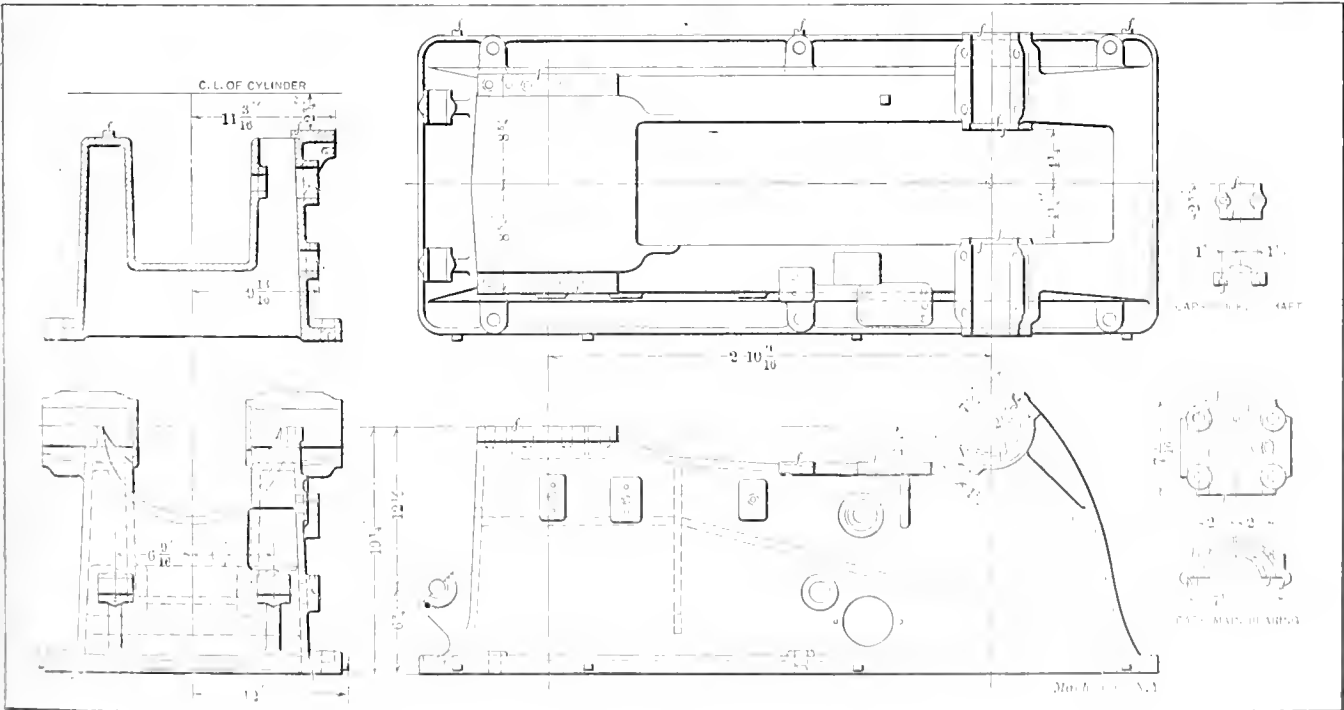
Plan and Elevations of a Bed for 8 3/4 by 11 Gas Engine
